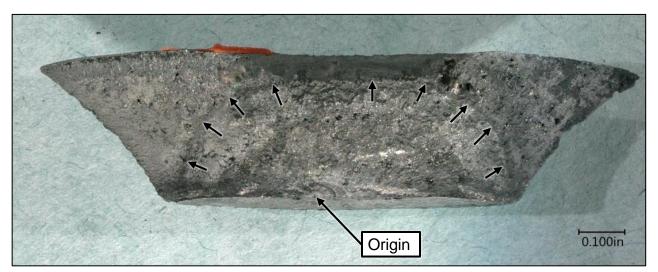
Fracture surface on the fractured piece of the magneto attachment flange. The fatigue origin is indicated and unlabeled arrows indicate a crack arrest mark.
